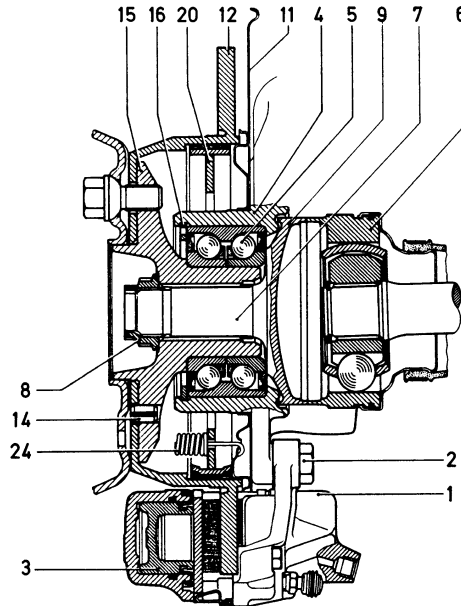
Rear axle wheel hub carrier with wheel and brake. The drive shaft 7 is butt-welded to the CV slip joint 6. The drive shaft transmits the driving torque to the wheel hub 15 via a serrated profile. Part 15 is carried by the maintenance-free, two-row angular (contact) ball bearing 5. The one-part outer ring is held in the hub carrier 4 by the snap ring 16.
